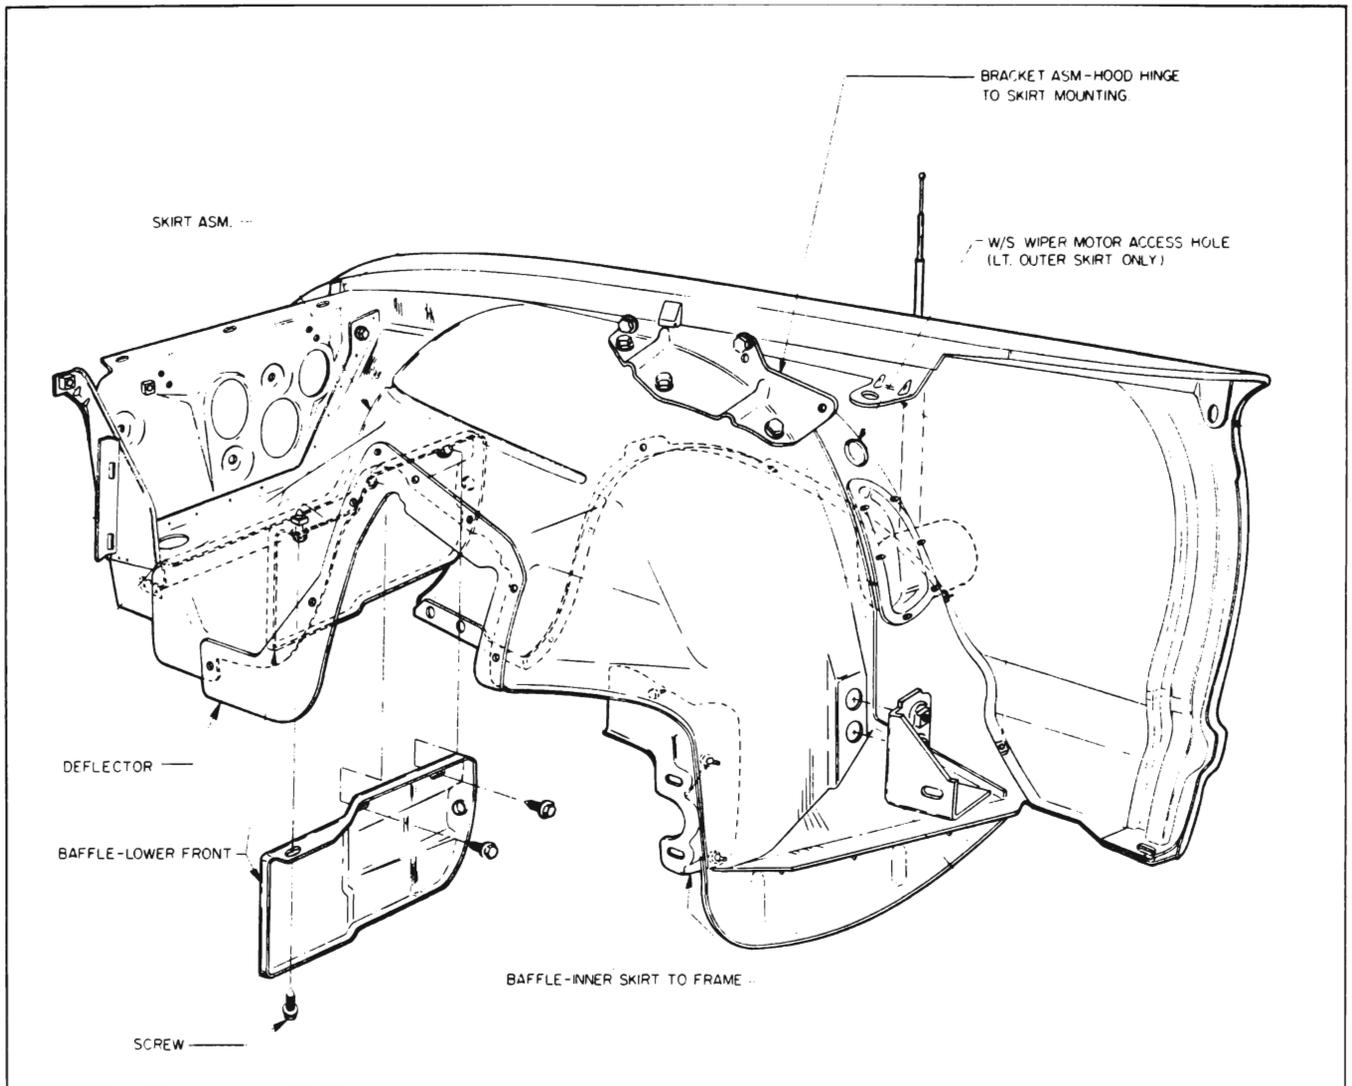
Front Fender Skirt Assembly—4700 Series
